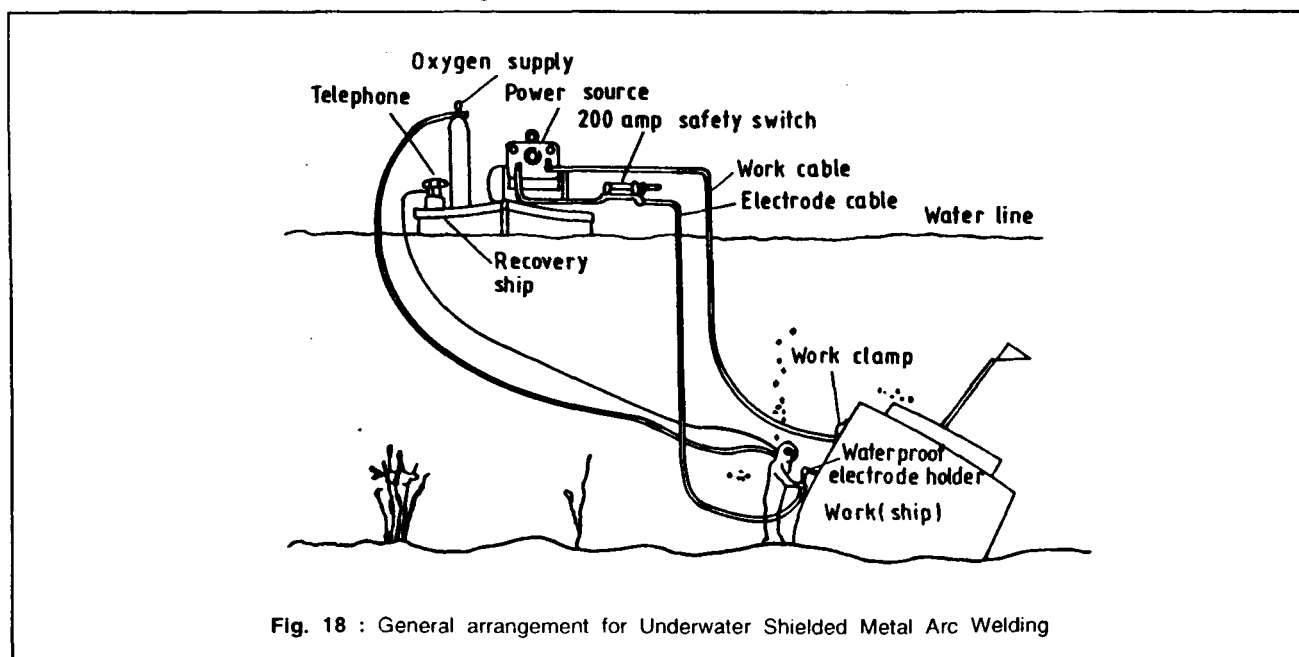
General arrangement for Underwater Shielded Metal Arc Welding
